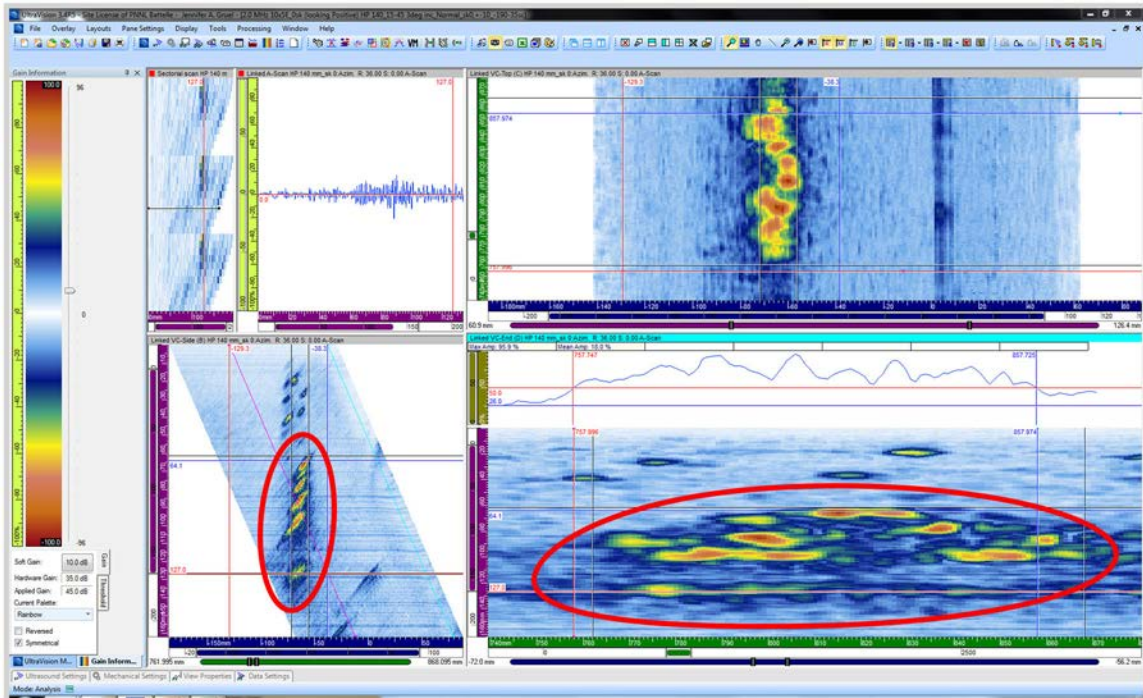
Looking Positive Skew 0 View of Circumferential Flaw 4 (indicated by red arrow) DM-10 with Weld Fabrication Flaws Circled and Boxed in Red
